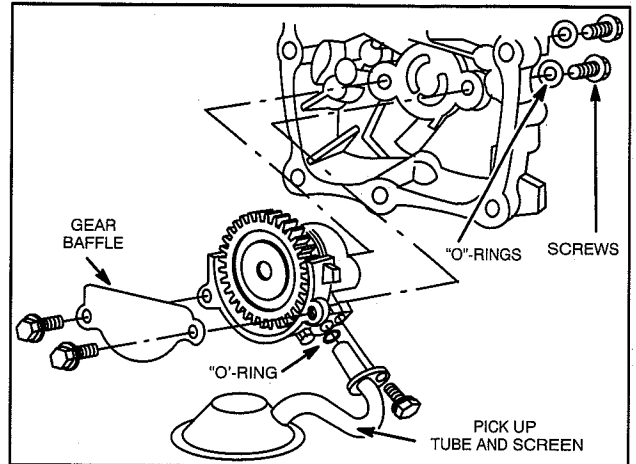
Installing Oil Pump - Horizontal Shaft
